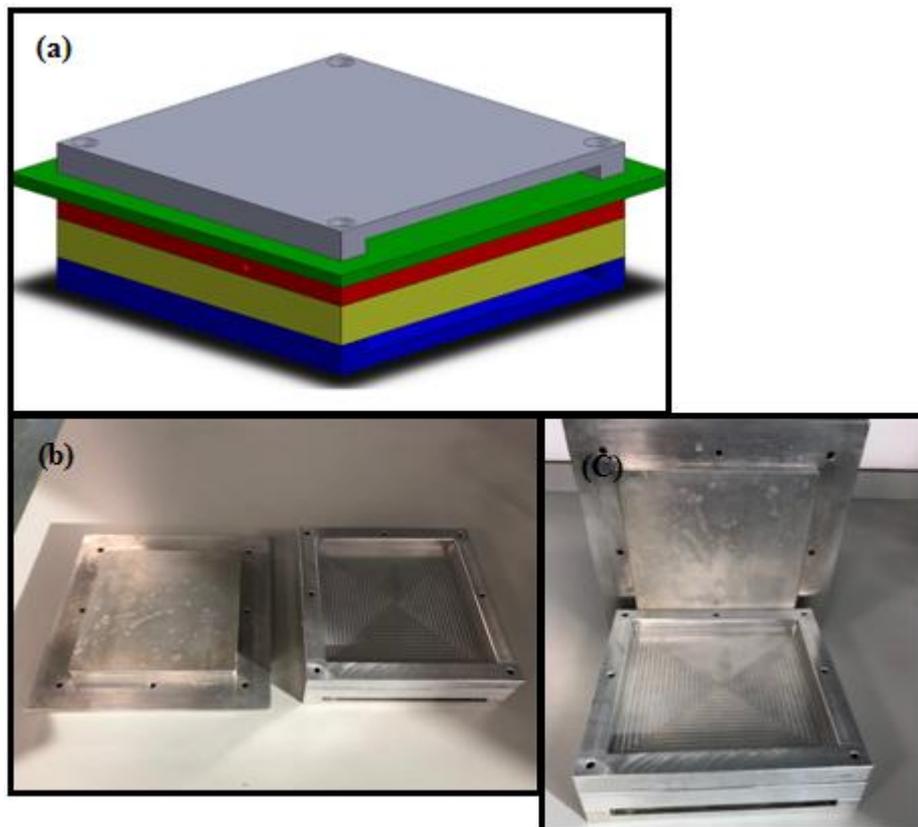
The Solidworks mould (a), and two view of final mould (b) and (c).
